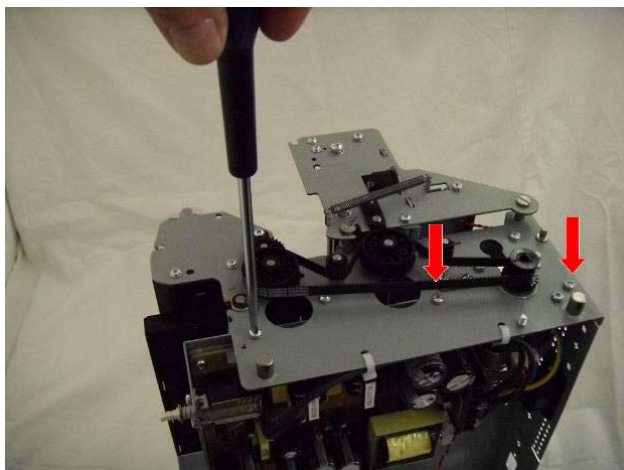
Lower Shield Assembly removal
